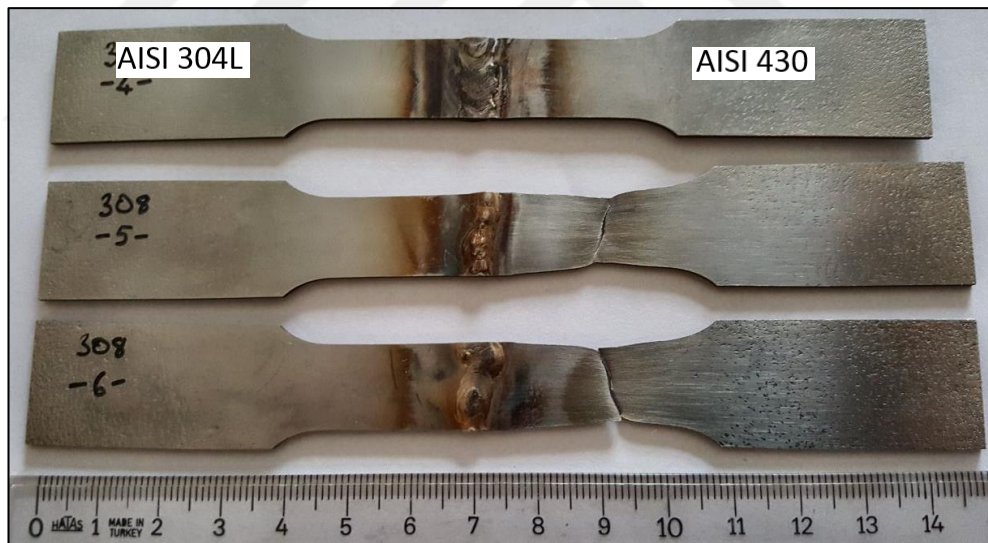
Macro photographs of the refraction areas of the Standard A welded tensile specimens combined with ER308 additional wire.
